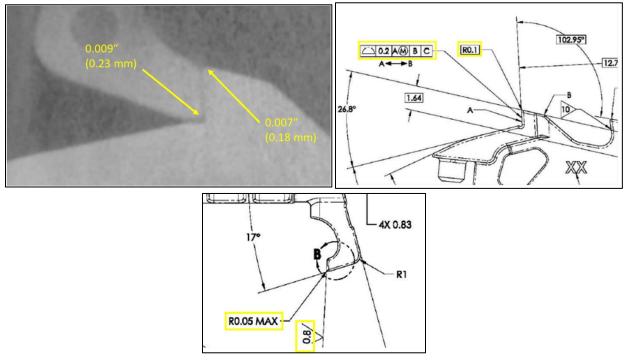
CT scan of the subject striker and sear (left), sear drawing (right), and striker drawing (bottom)
